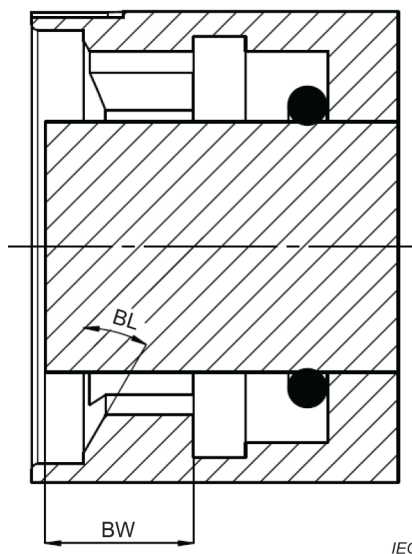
Side view of the female side of the push-pull housing for Type 2
